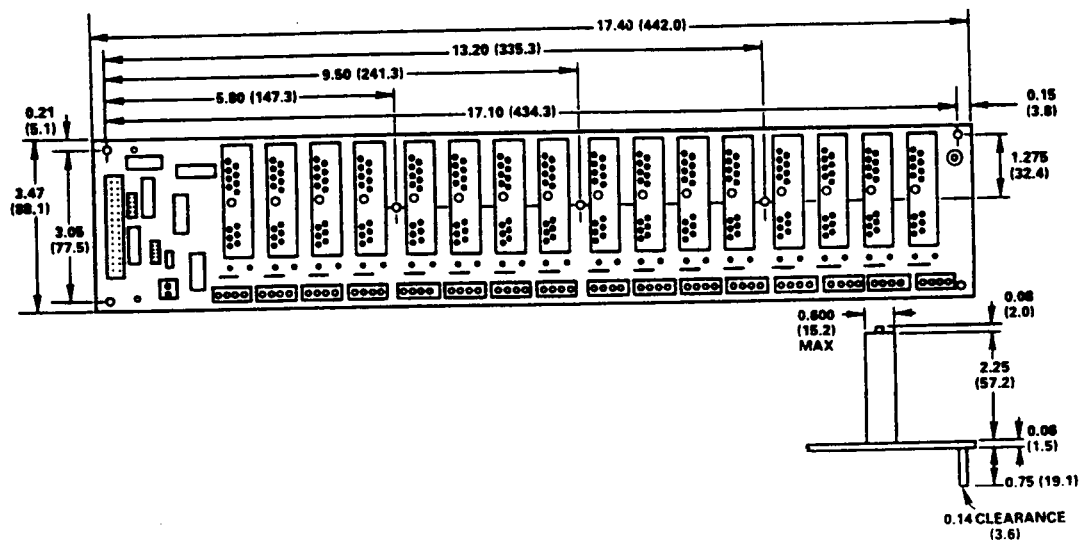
5B01 and 5B02 Backplane Mounting Dimensions in Inches and (mm)
